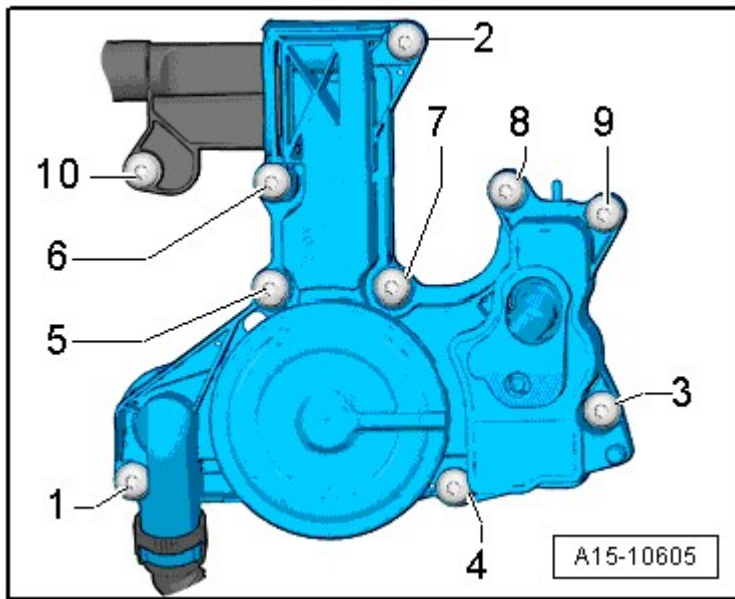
Identifying Crankcase Ventilation - Tightening Sequence
